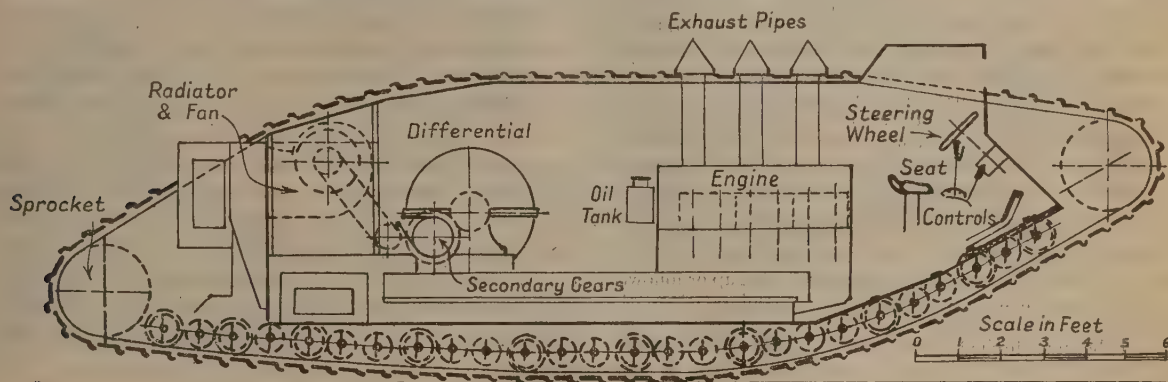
Sectional view of Mark I. Tank (tail omitted).
